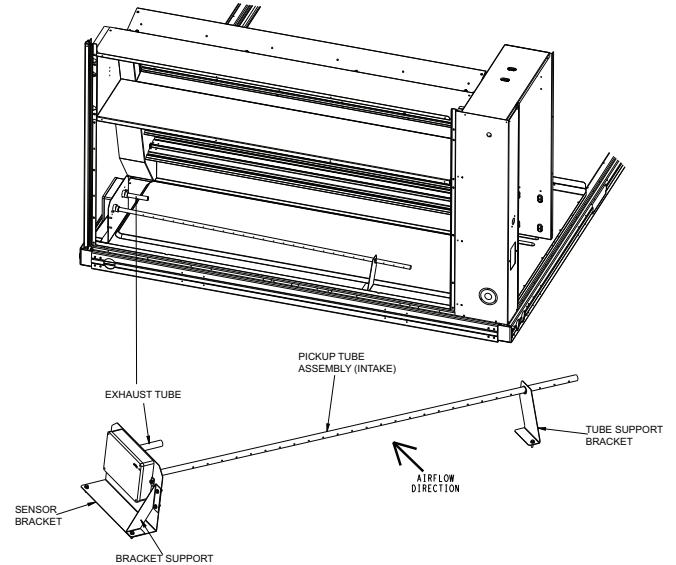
Horizontal Return Air Sampling Sensor Assembly and Tube Location
